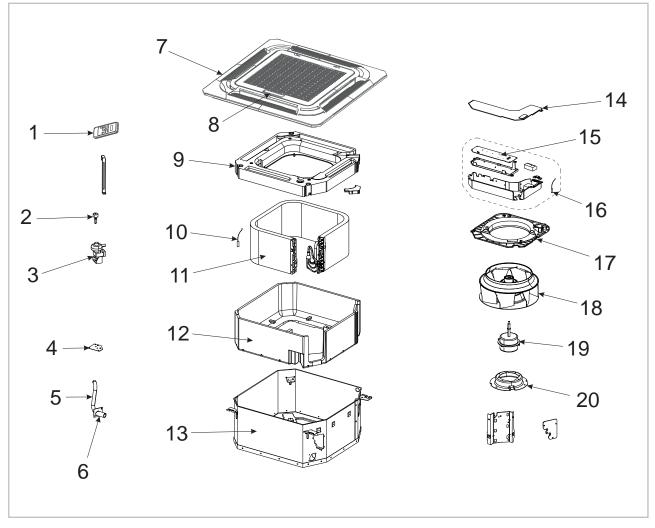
Exploded view of the unit RVD 355-525 DC IT
